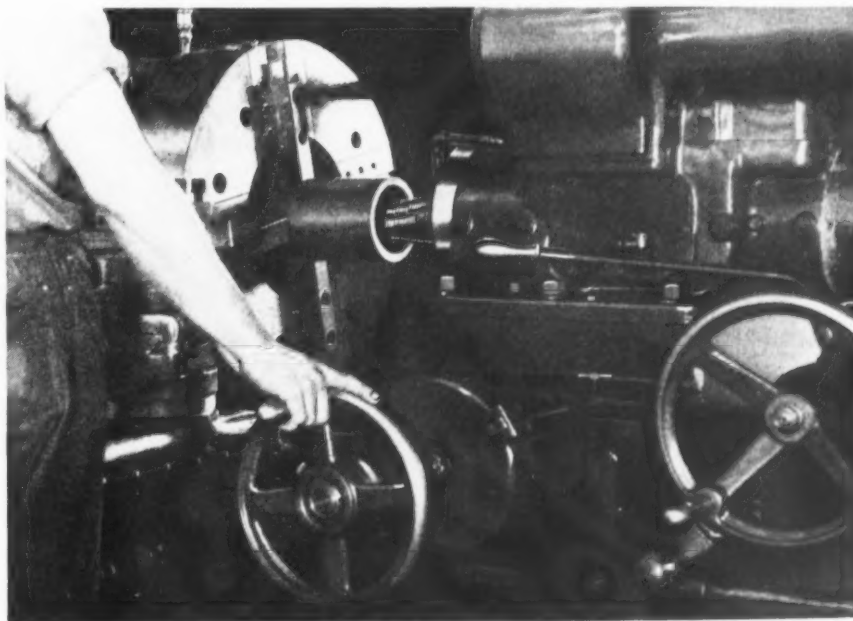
Close-up View of a Thread Milling Operation in a Rotary Drill Collar, Performed by the Machine Shown in Fig. 2
